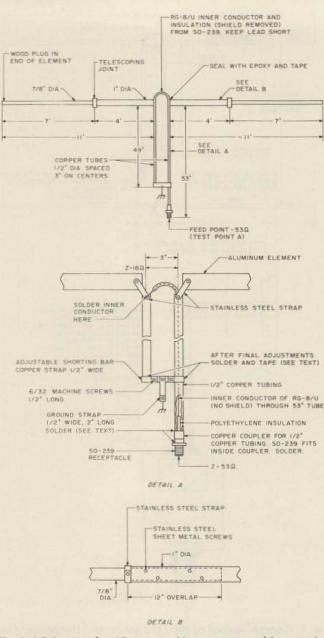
LB-2 array for 15 meters. Use same matching section for 10 meters but see Table 1 for shorting bar position. General dimensions of driven element are shown. Detail A shows matching section. Detail B shows method for joining element sections.
